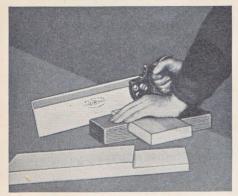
Cutting shoulders of half lap joint with ATKINS Silver Steel Back Saw No. 2, in bench hook.
